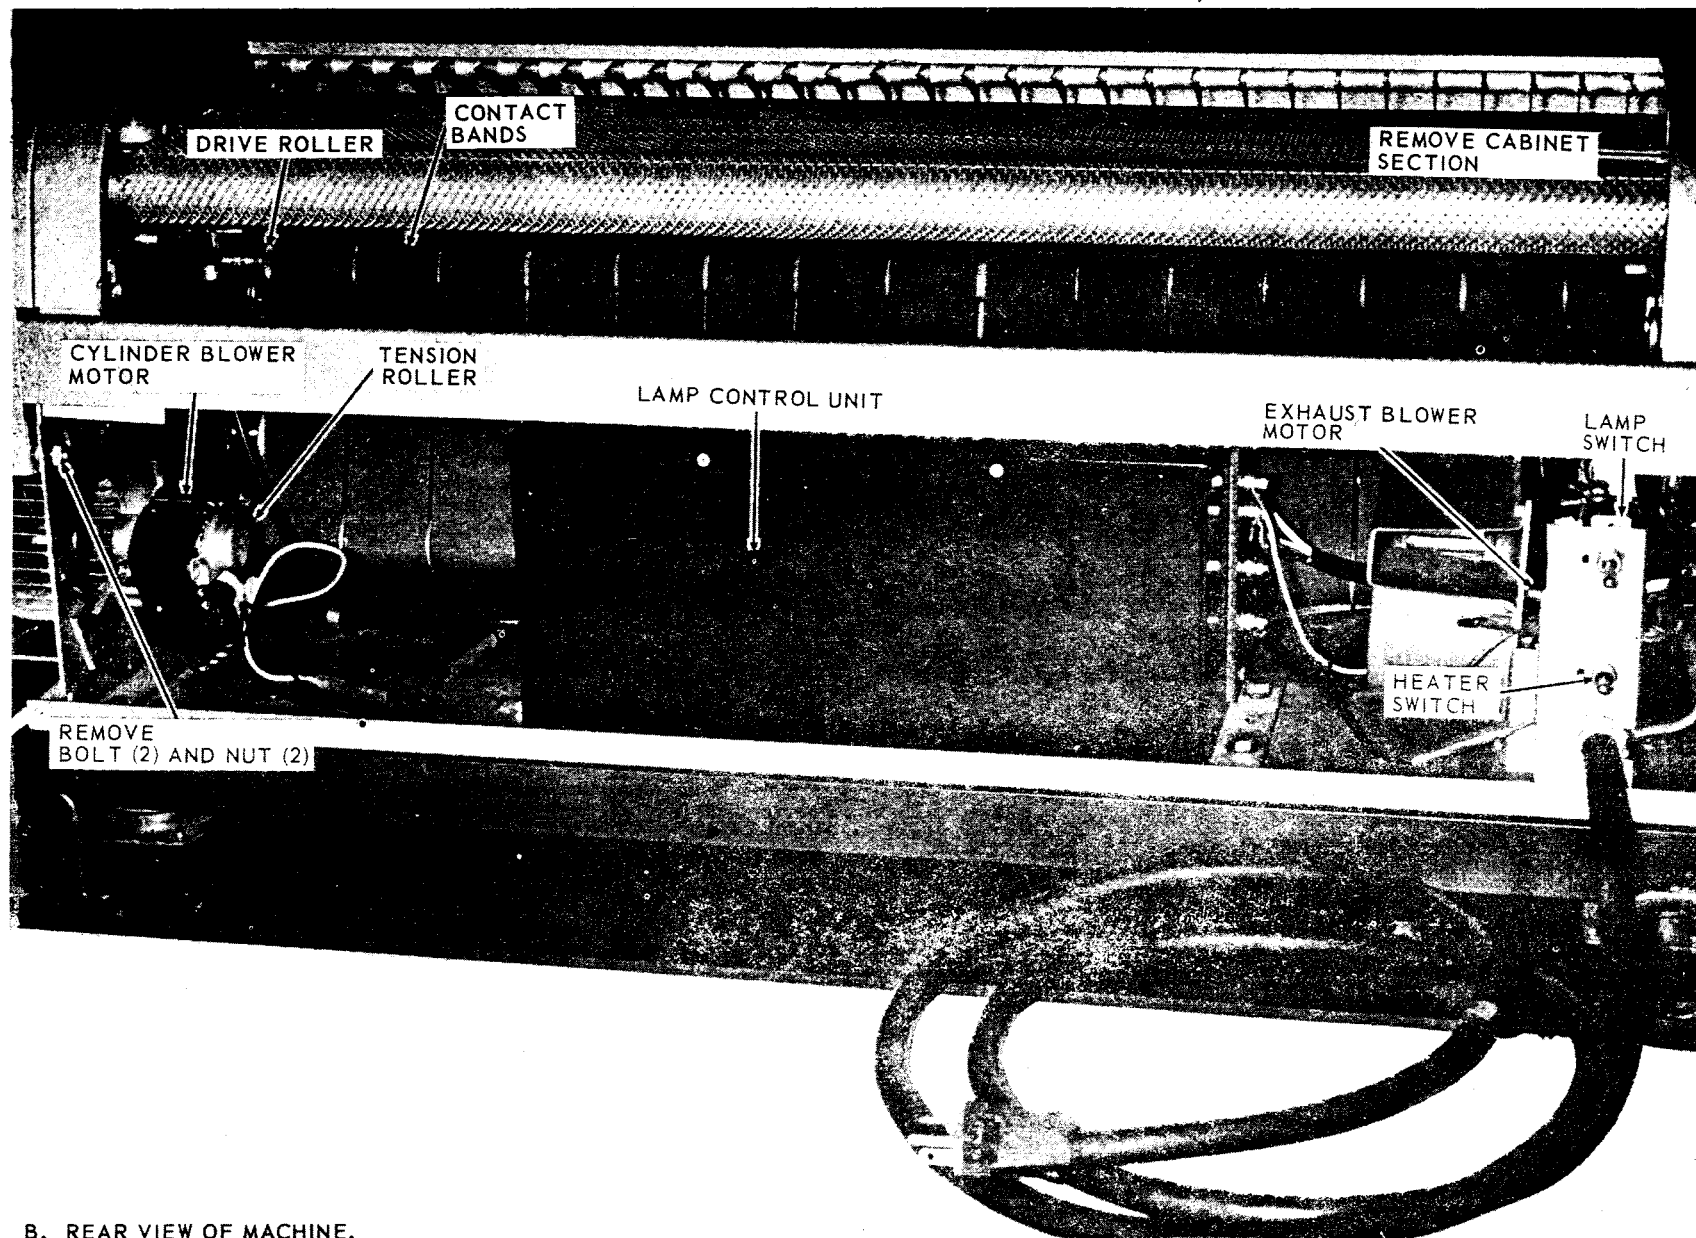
Cabinet section assembly removal and installation (sheet 1 of 2).
